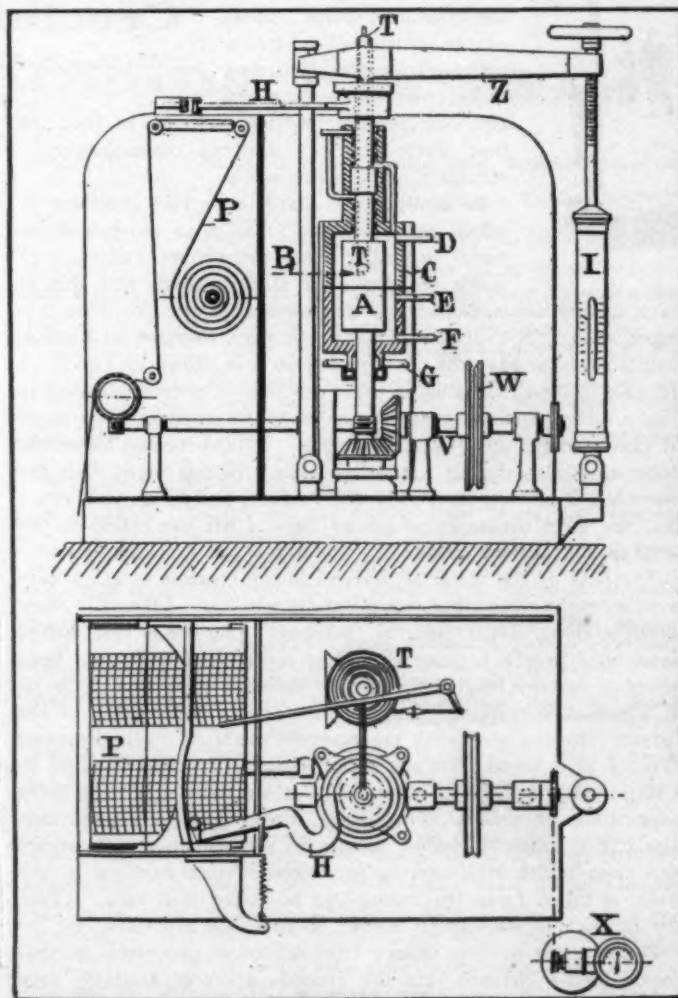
The Ossag machine for testing lubricating oil under many different working conditions
